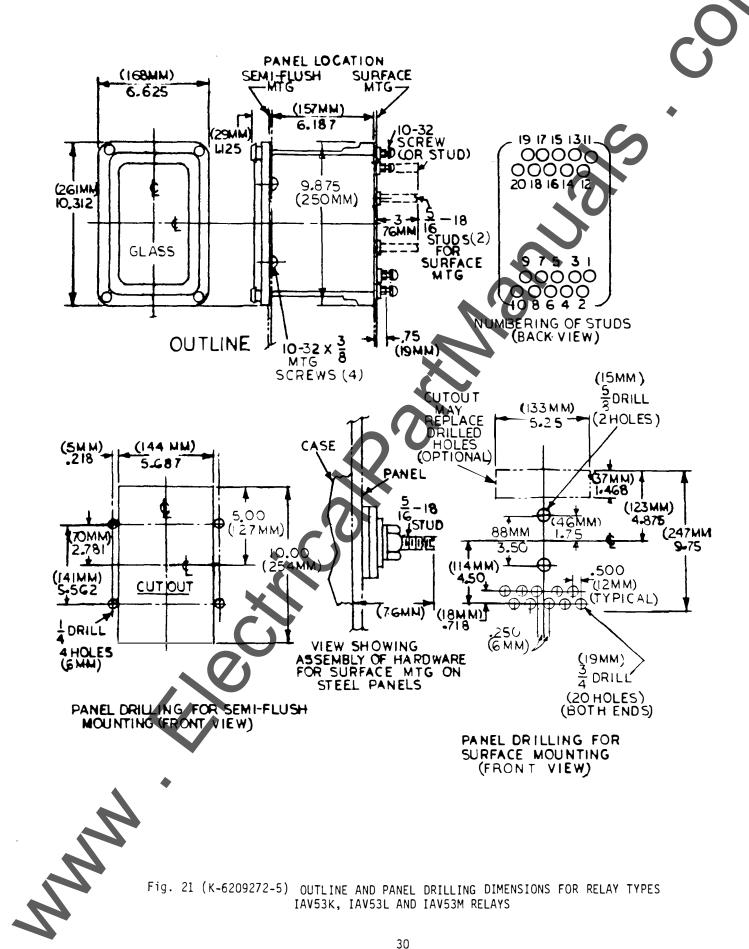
(K-6209272-5) OUTLINE AND PANEL DRILLING DIMENSIONS FOR RELAY TYPES IAV53K, IAV53L AND IAV53M RELAYS
